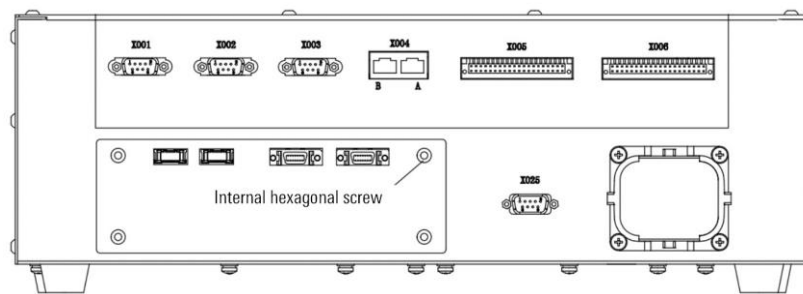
ARCCD20-diagram after installing the gusset plate and fixing the sheet metal
